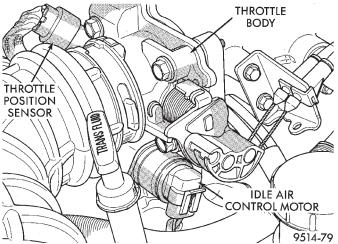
Idle Air Control Motor Air Bypass Passage— 2.5L
